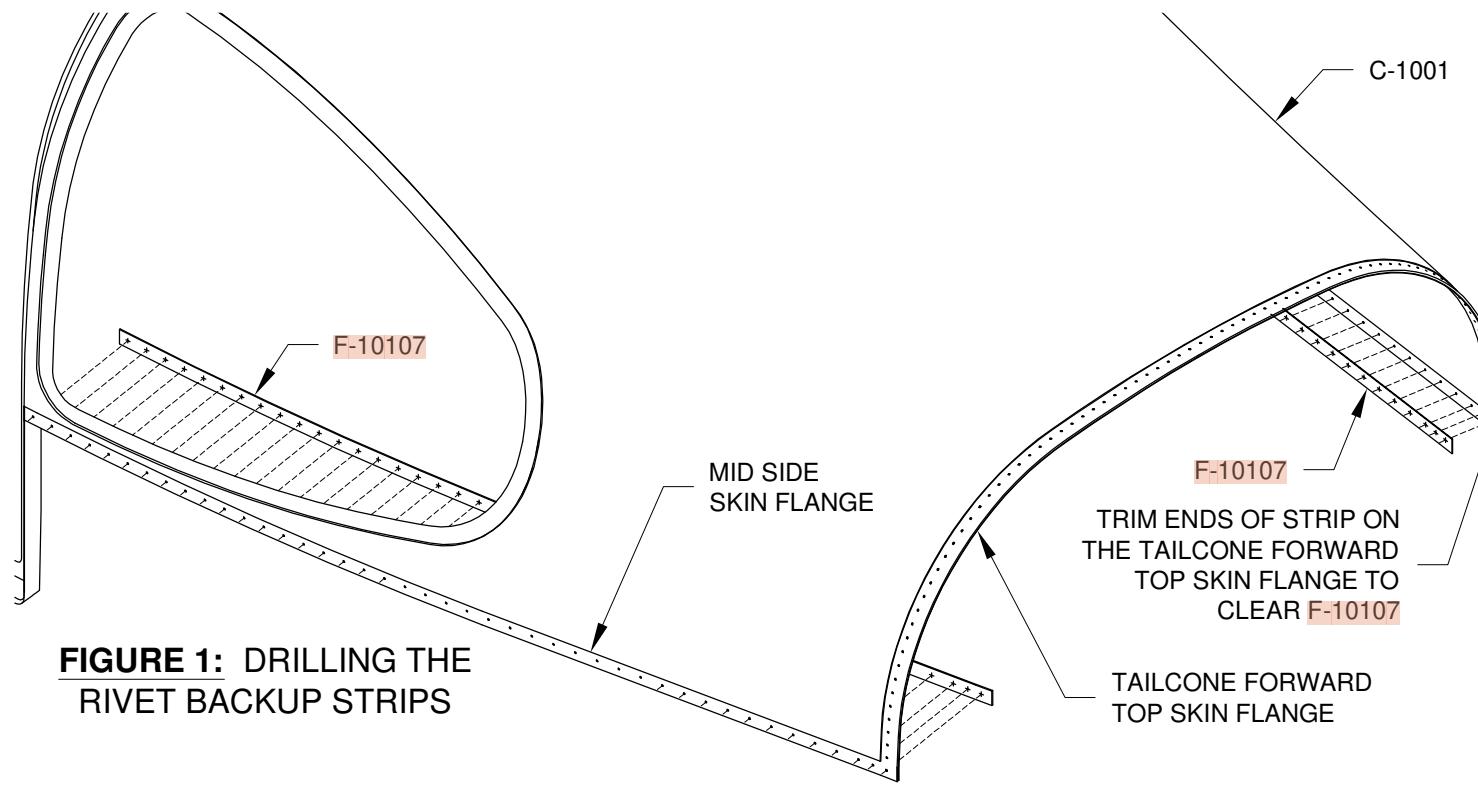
DRILLING THE RIVET BACKUP STRIPS
